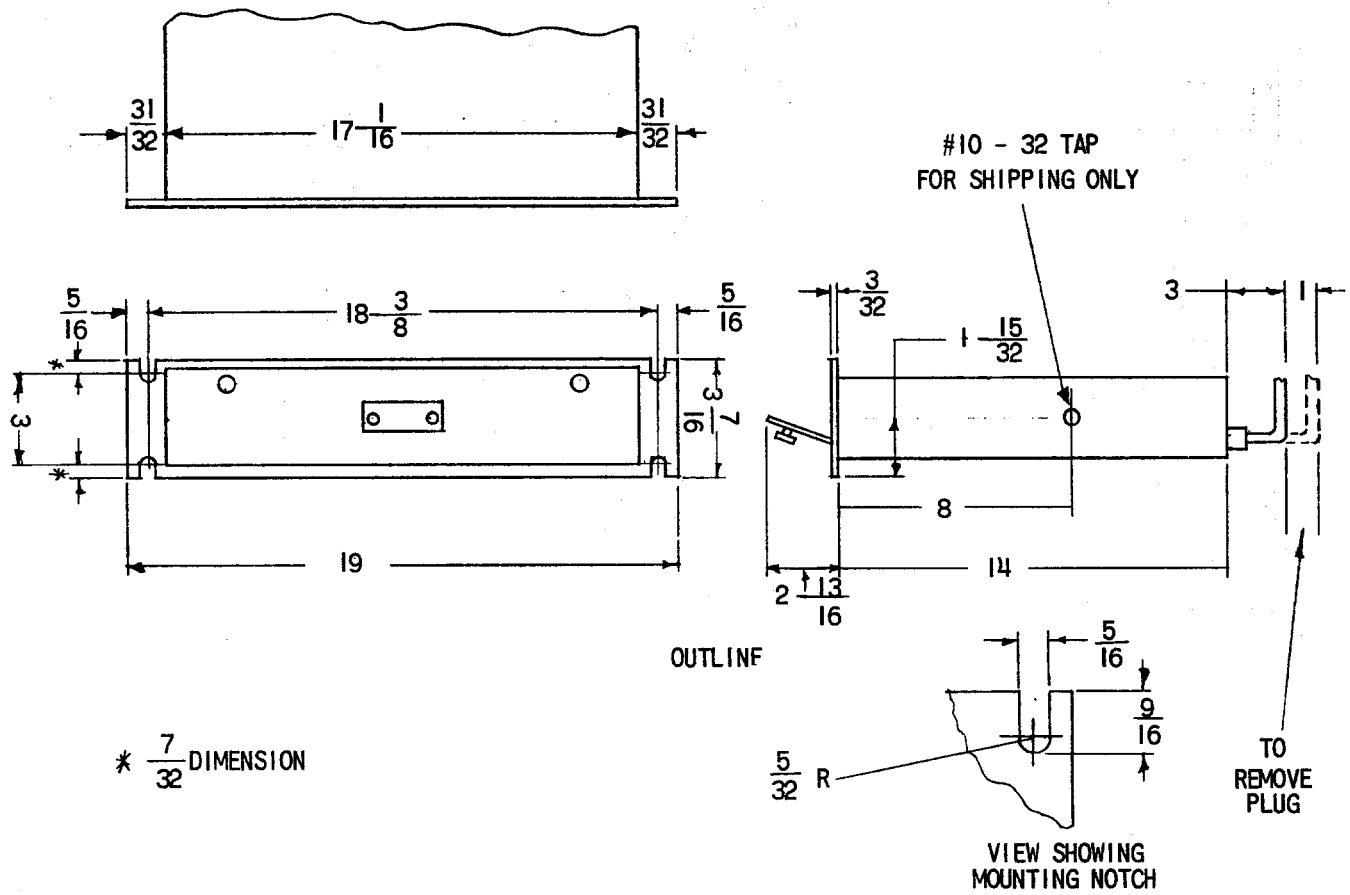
(0227A2036-0) Outline And Mounting Dimensions For The Type SLYN51A Relay
